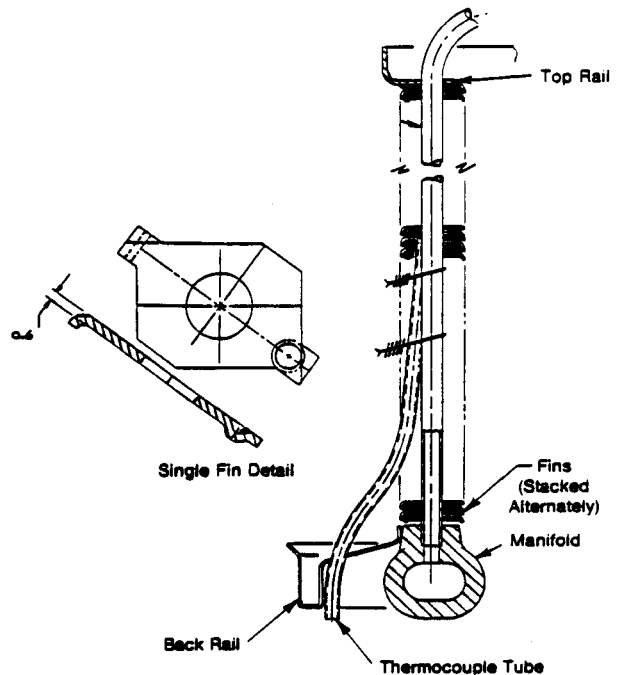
Tube-Fin Arrangement, Heater Head No. 1
